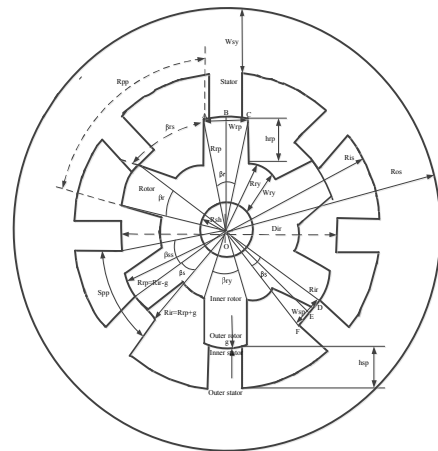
Cross-section of 4-phase 8/6 double salient reluctance machine.
